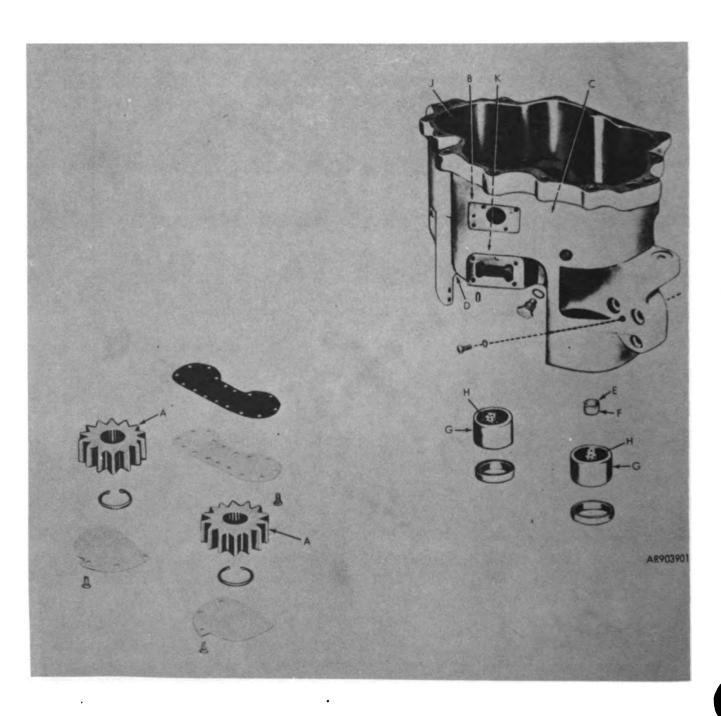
Traversing gearbox lower housing wear points (1 of 2).
